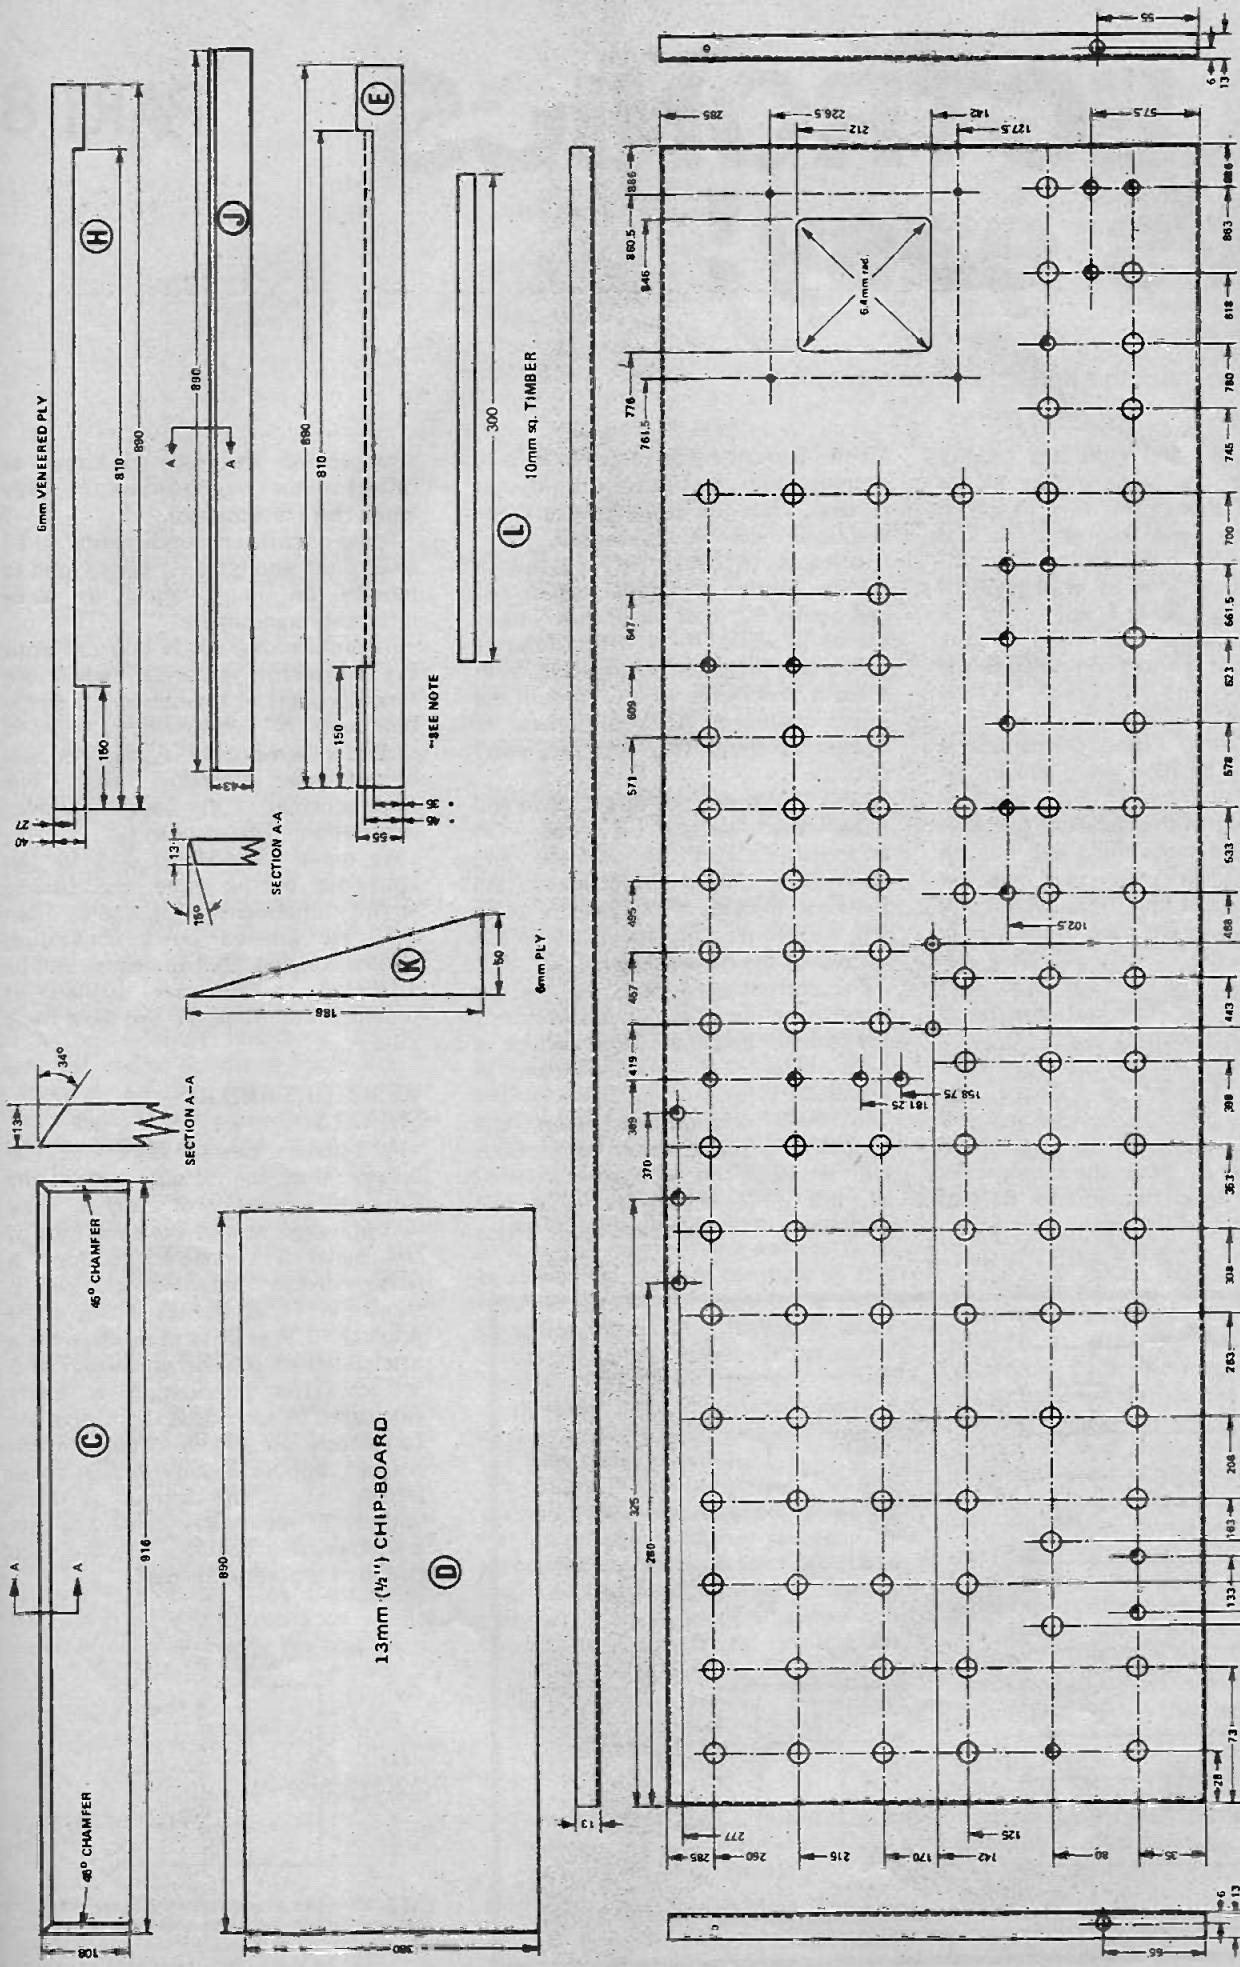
Cabinet assembly. Letters designate pieces described in separate drawings.
